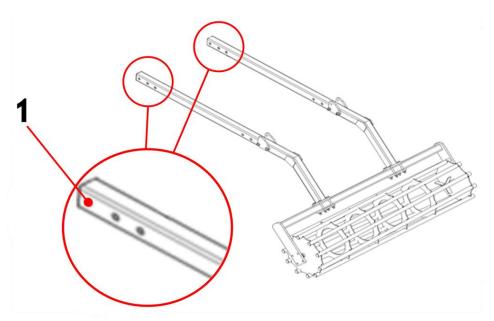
Arm mounting holes (1 - mounting hole - see NOTE!)
